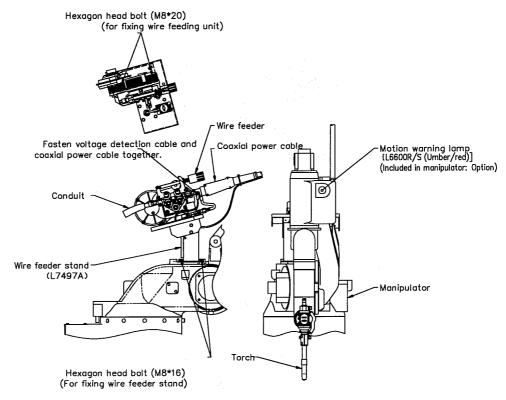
Mounting on manipulator "Almega AX (EX)-MG series robot"
